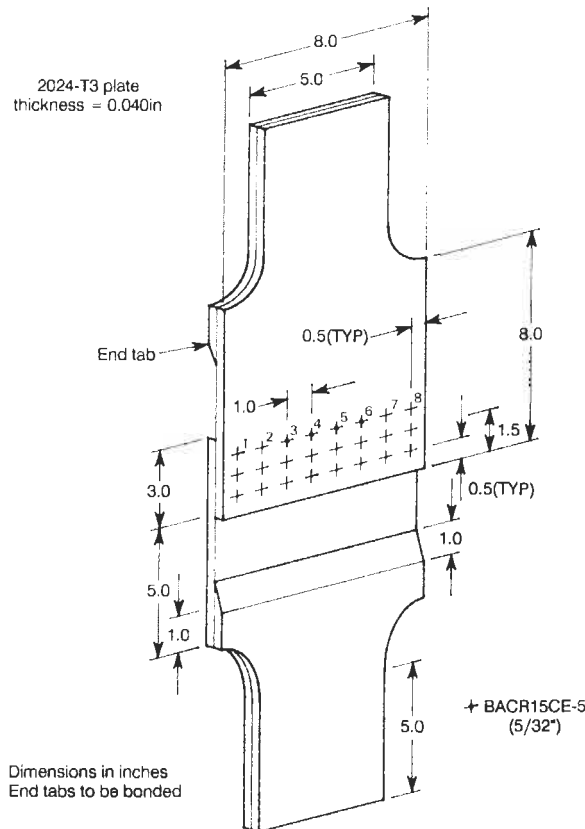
Uniaxial "Boeing" type lap joint specimen. Note rivet numbering used in this chapter.
